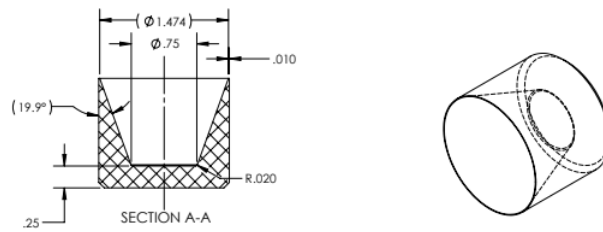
Technical drawing of the obturator used in BTRA experiments
